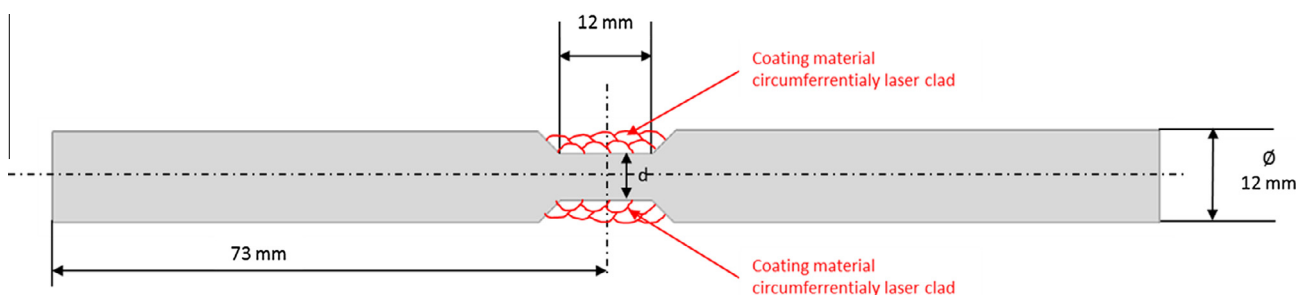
Laser cladding specimen geometry. Diameter of grooved section (d) are 5.5 mm (S), 6 mm (M) and 6.5 mm (B).
